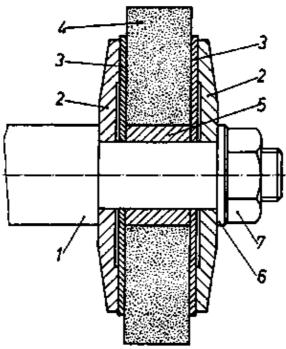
Assembly drawing of a grinding-wheel mount
